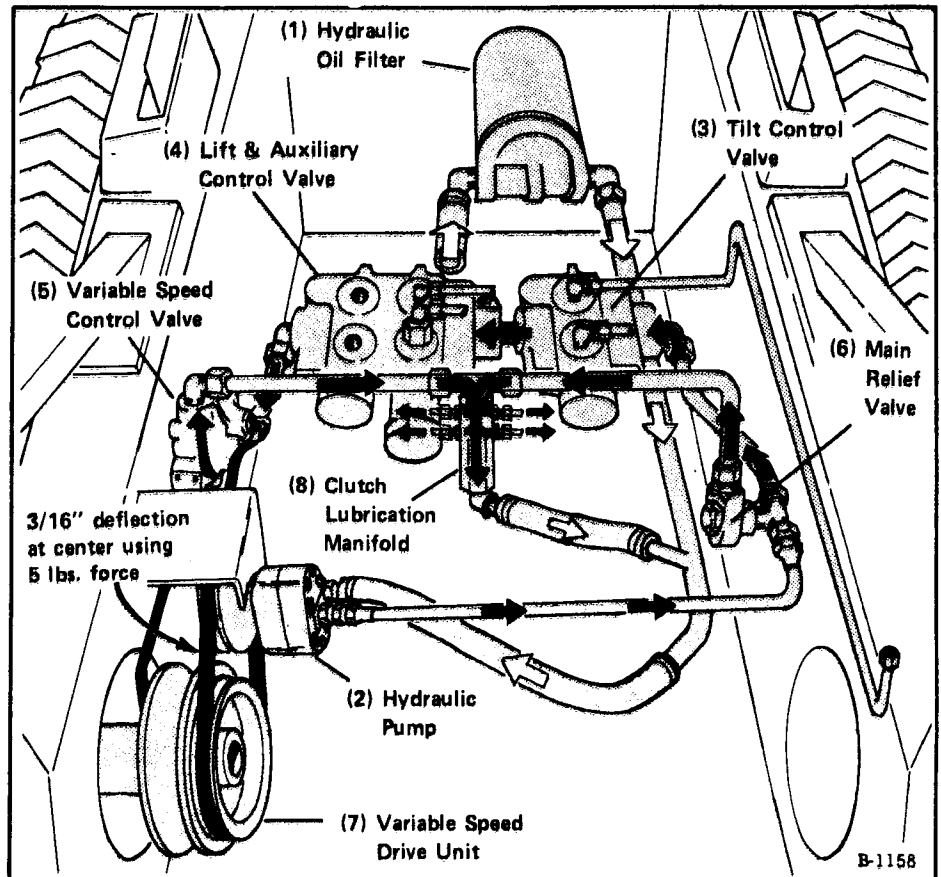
Hydraulic System (M-600 Electric & M-600 Diesel W/Petter Engine)
